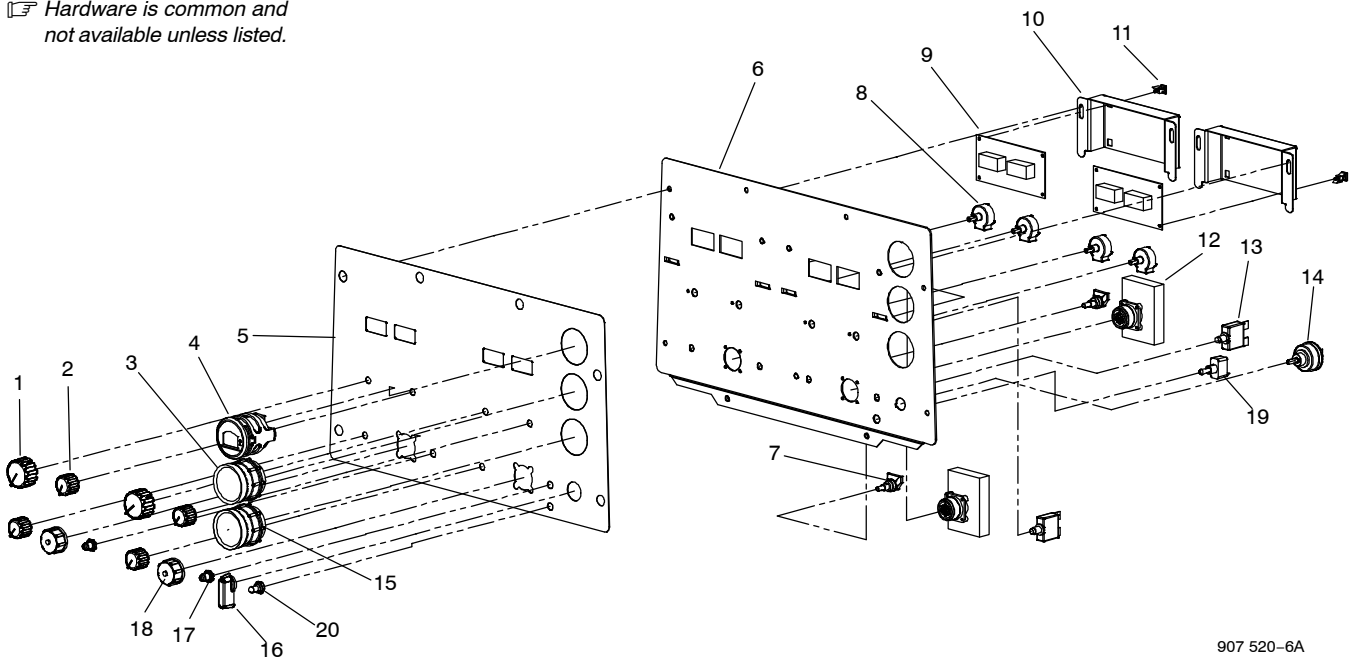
Panel, Front Engine & Weld Controls
